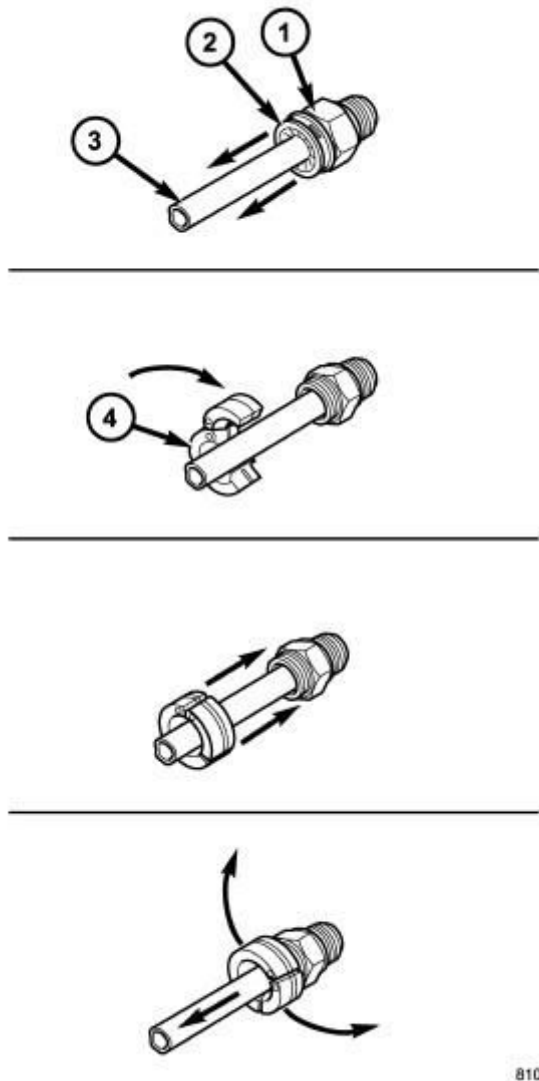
Oil Cooler Line Quick Connect Fitting - Disassembly
